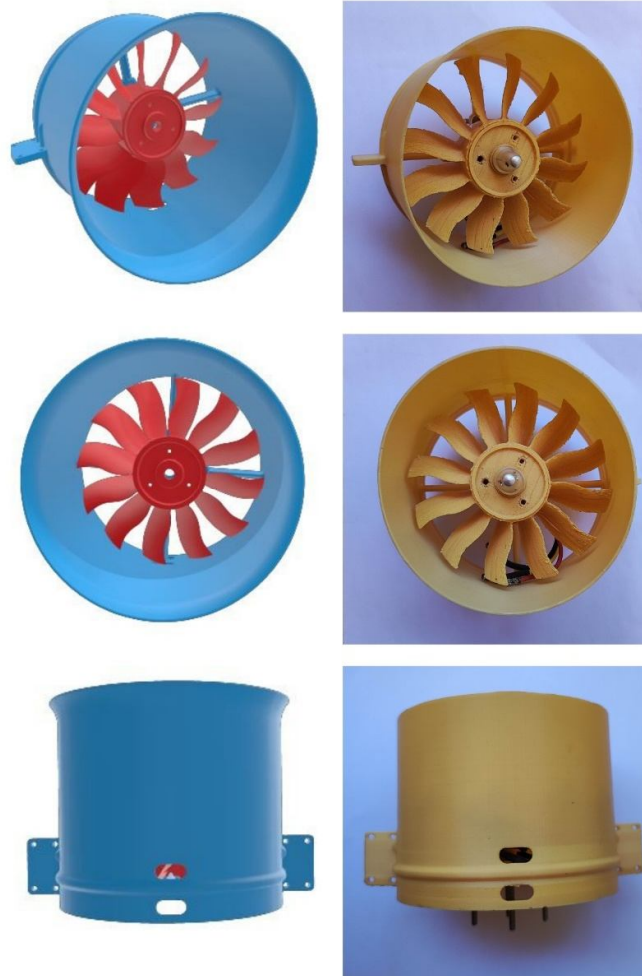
Three-dimensional drawing and 3D printed model of EDF
